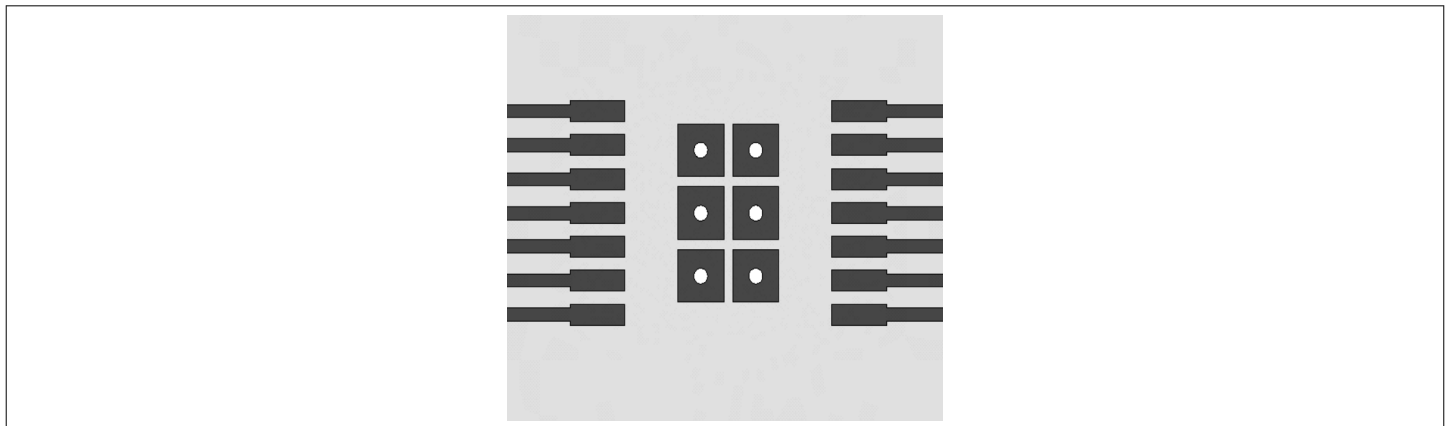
Thermal vias on PCB for 2s2p PCB setup
